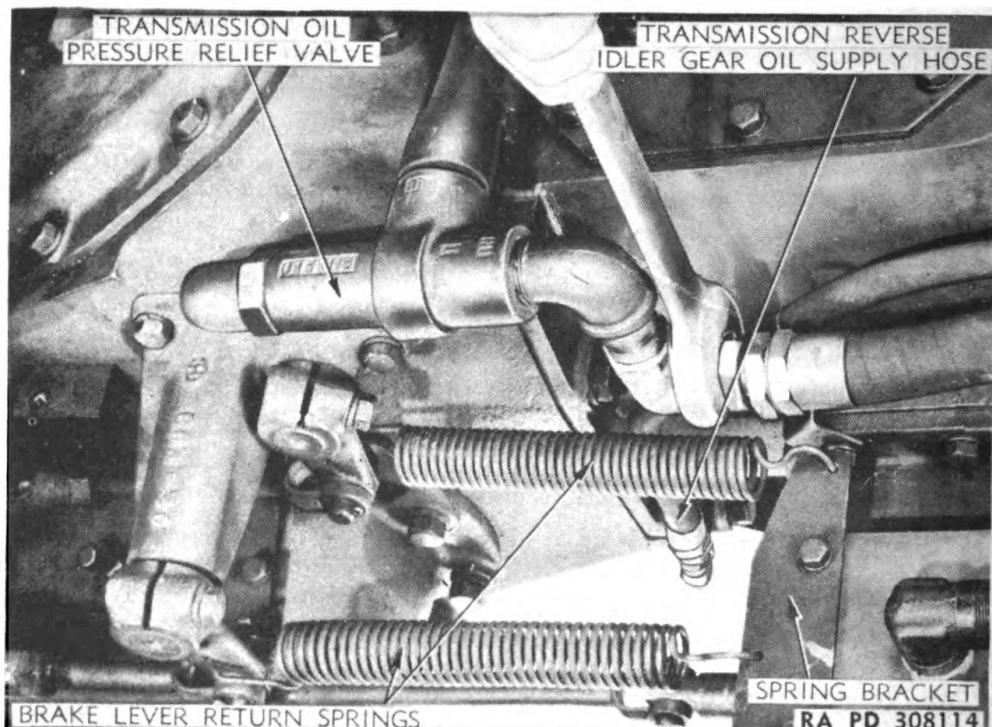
Disconnecting Oil Pressure Relief Valve Inlet Hose
